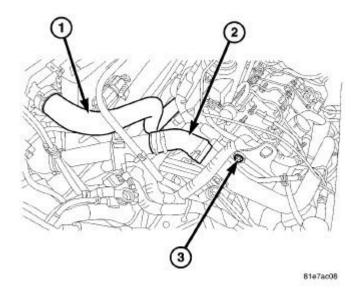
Charge Air Cooler Hoses Courtesy of CHRYSLER LLC
